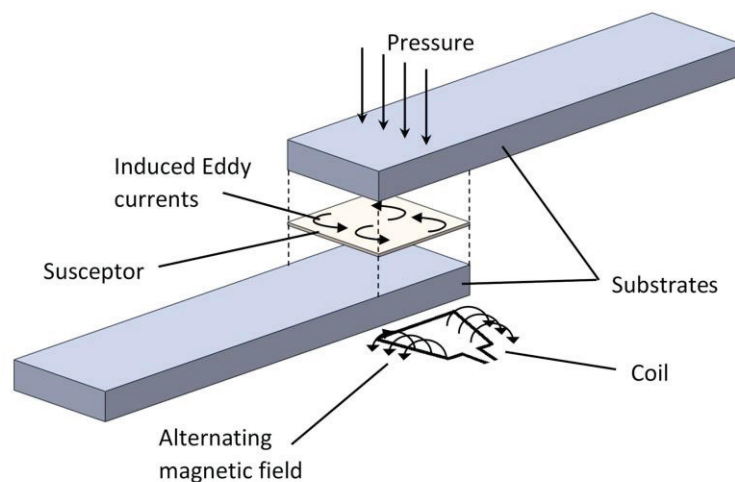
Schematic representation of induction welding process.⁷⁵
